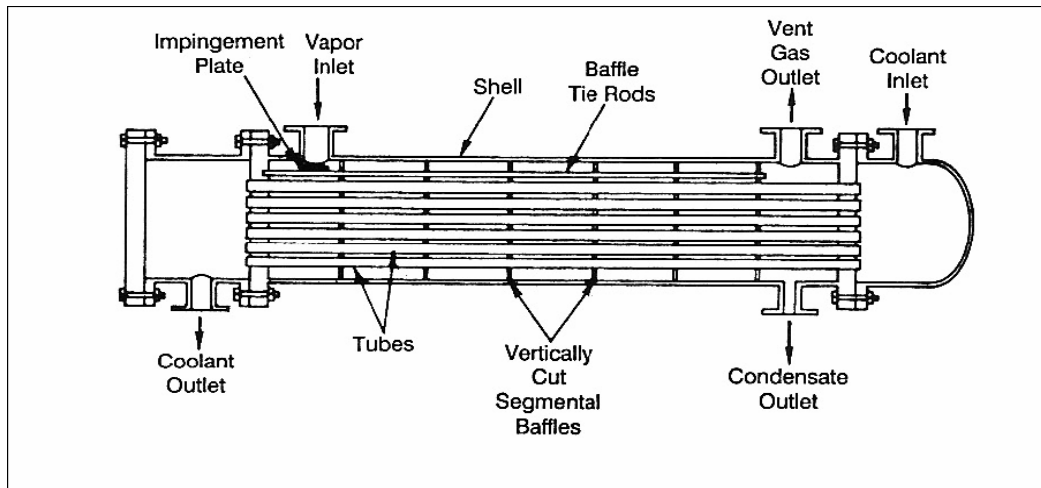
Shell and tube heat exchanger as a shell side condenser (Kakac, 2002)
